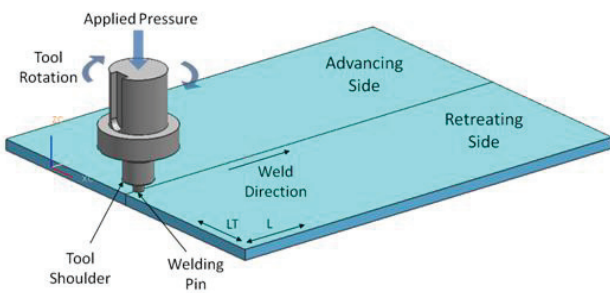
Schematic of Butt-Weld Geometry and FSW Orientation
